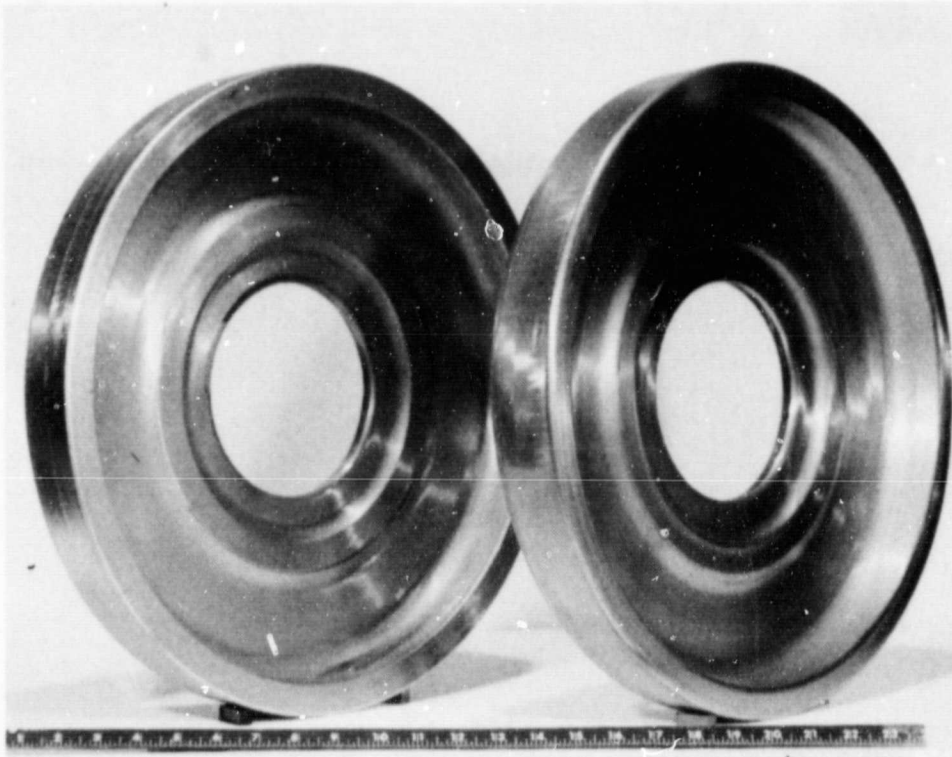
CFM56 Compressor Disks in Sonic Machined Configuration After Hot Die Forging From Powder Preforms.
